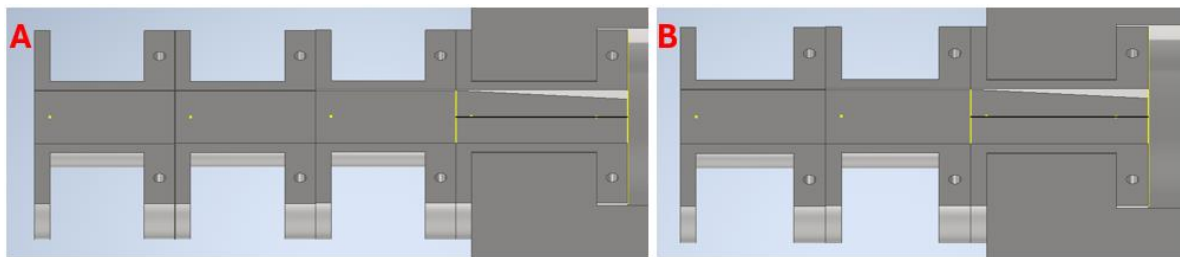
Tilted view of one half of the assembled die configurations used for the first testing phase.
